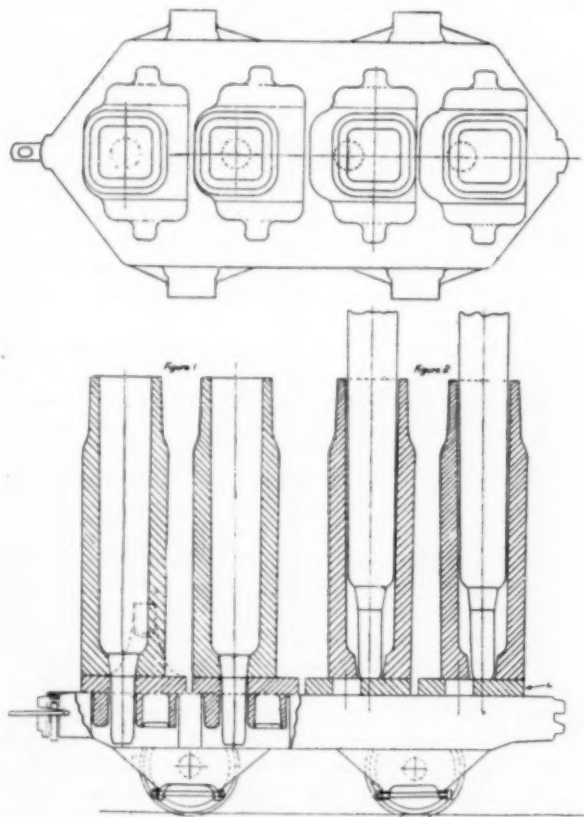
INGOT MOLDS FOR PRODUCING SOUND CASTINGS
